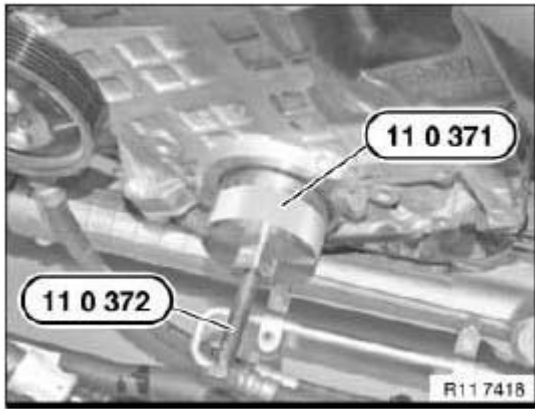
Identifying Special Tool 11 0 371 And Spindle 11 0 372
